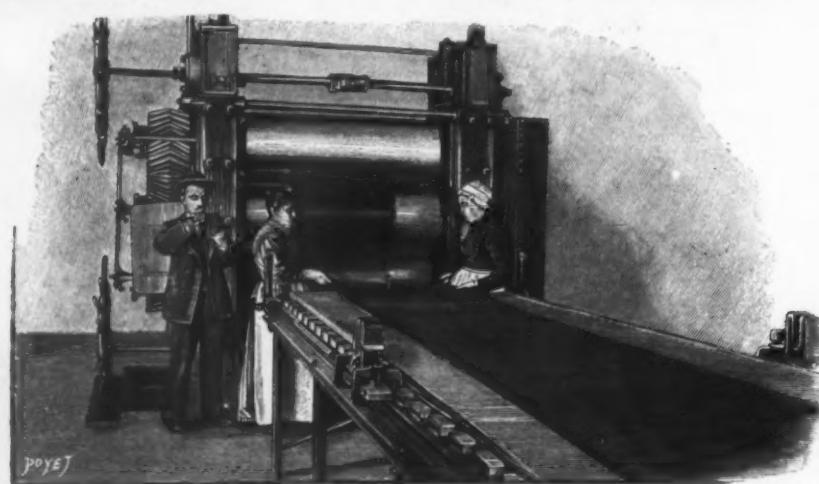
A SHEET OF RUBBER MAKING ITS EXIT FROM THE CALENDER.
